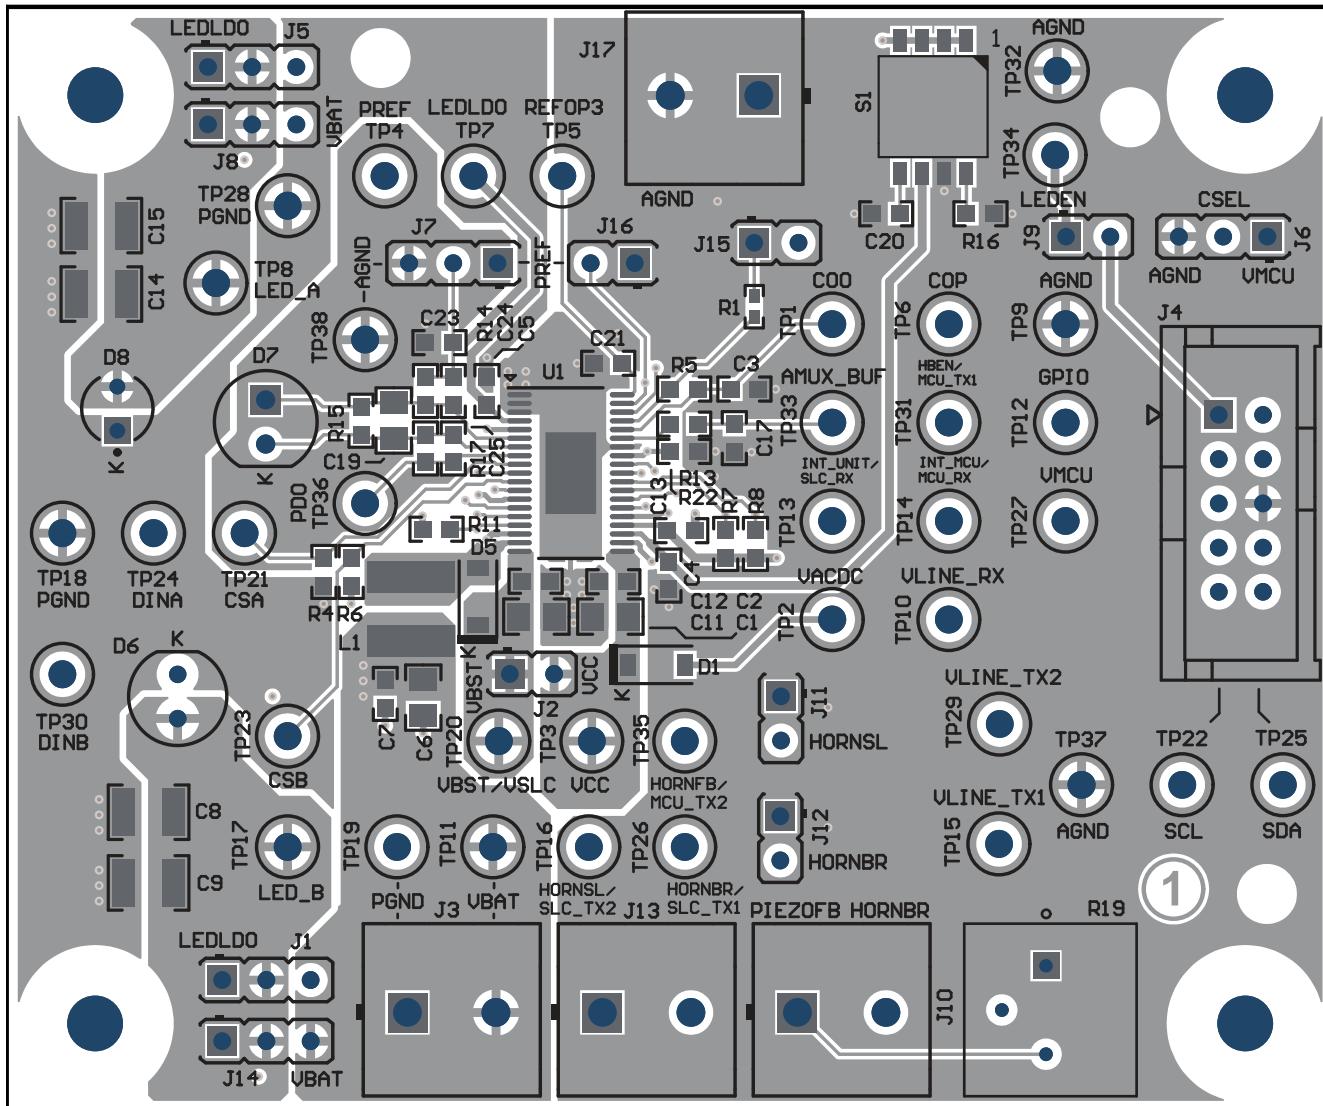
TPS8802EVM Top Layer PCB Layout
